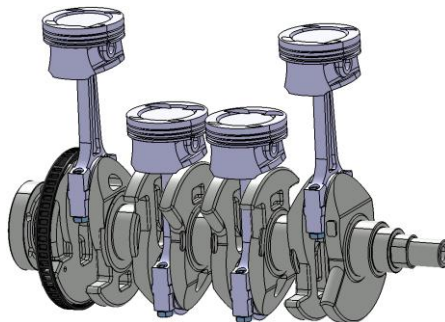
Model of crankshaft-piston system in *Catia v5
